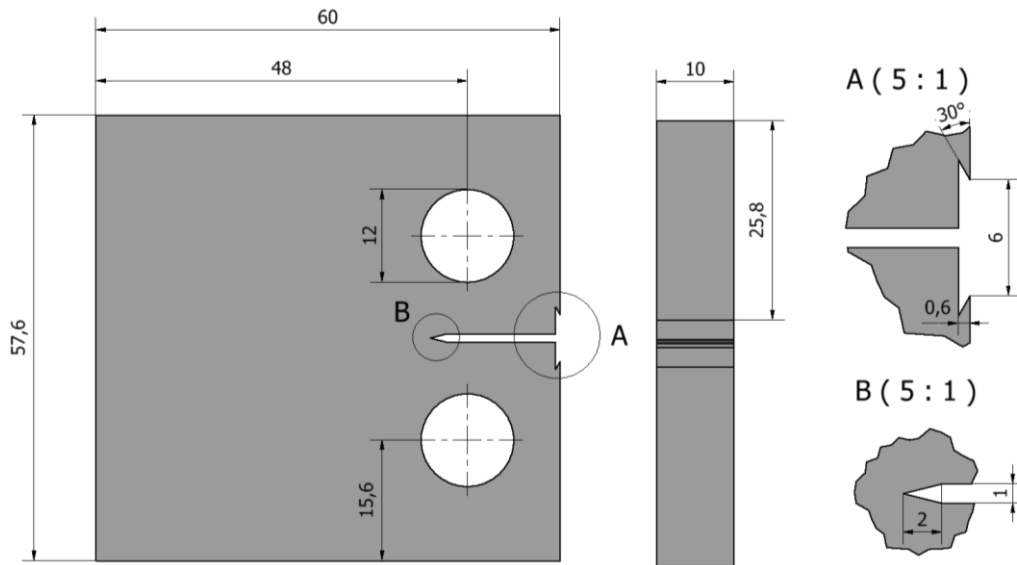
Geometry and dimensions (mm) of the CT specimens used in the fatigue crack growth tests.
